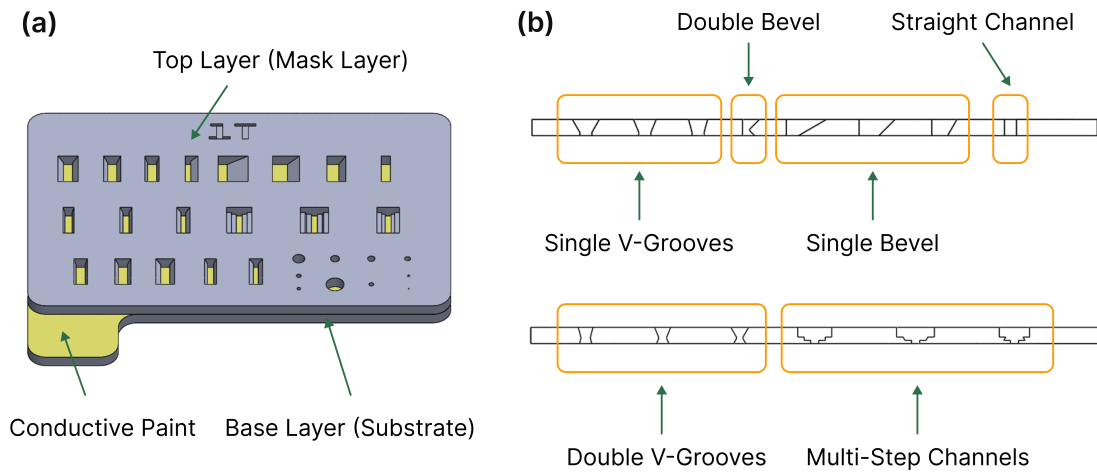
The geometrical features mold. (a) CAD model of the mold assembly, (b) cross-section illustrating various features of the top layer of the mold.
